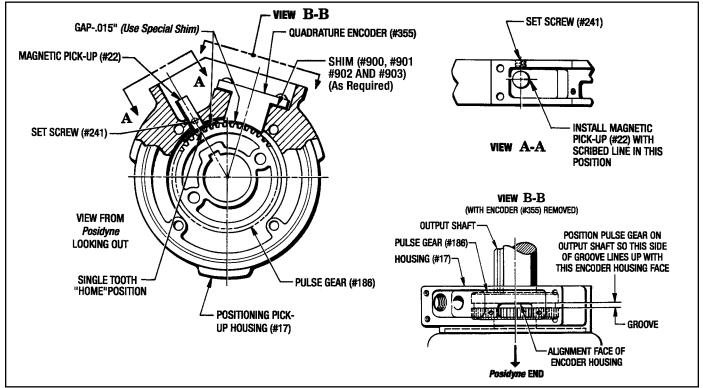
Quadrature Encoder Position Sensors Installation
